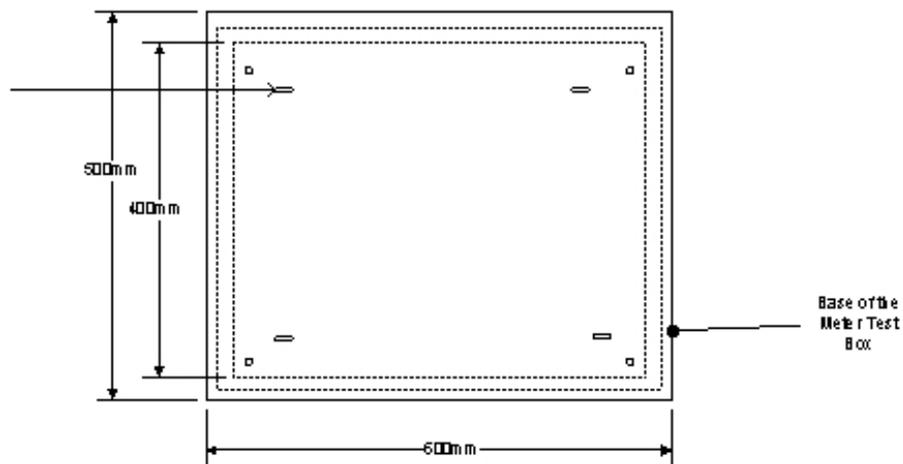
L: 1,2,3 OR 4 FEEDER METER TEST BOX - To be placed inside Metering Kiosk
